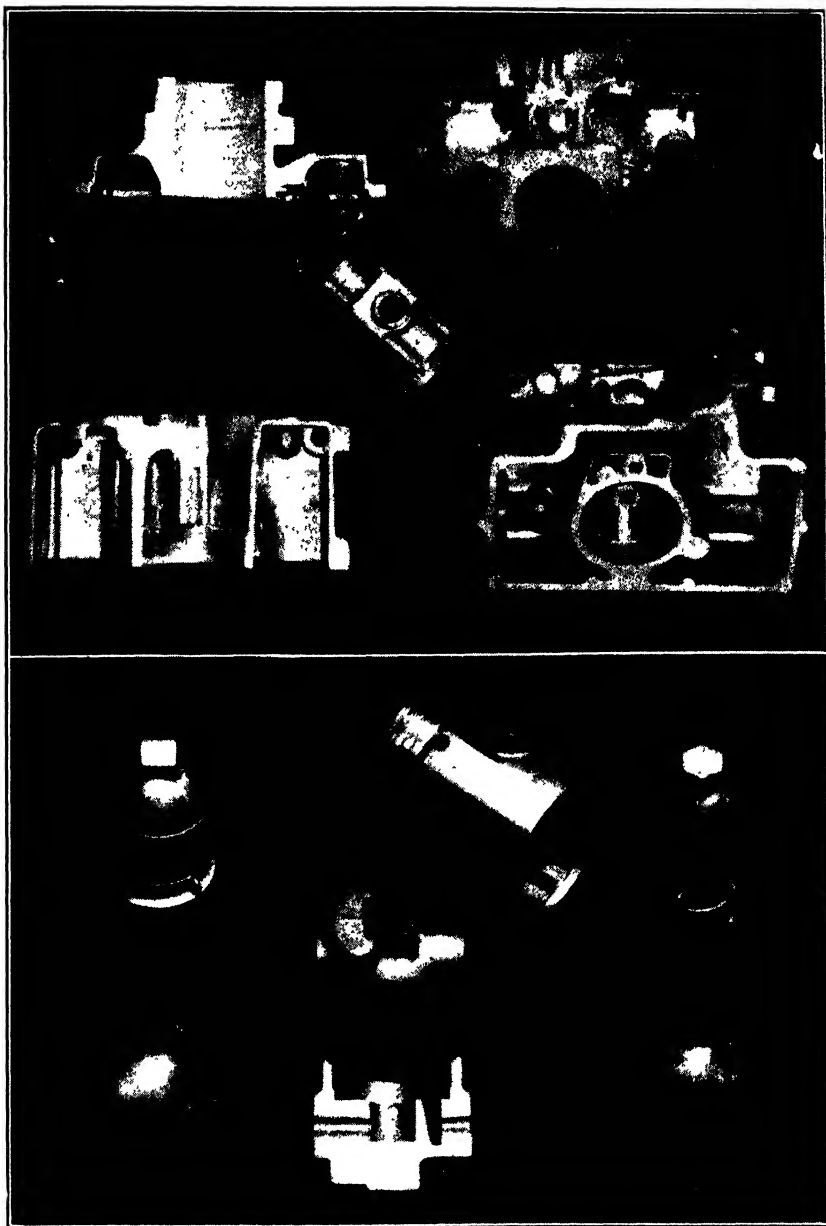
Examples of semi-permanent and permanent mold castings. Note cut parts showing the contour of the cross-section. (Courtesy The Permold Company.)
